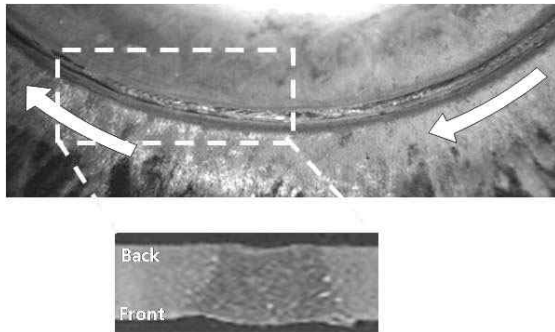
Back bead shape of TIG orbital welds around P06:00 (root face 3mm, butt joint)
